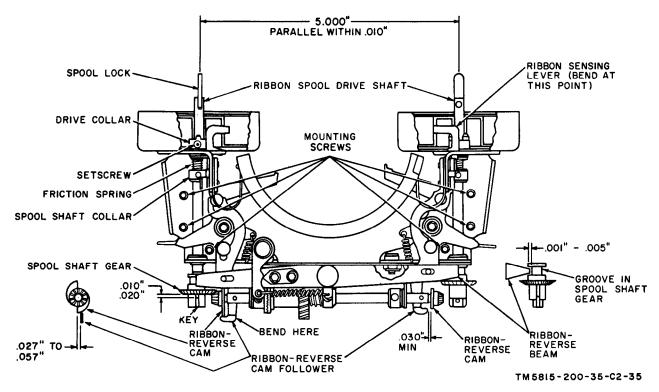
Ribbon-feed mechanism adjustment requirements.
